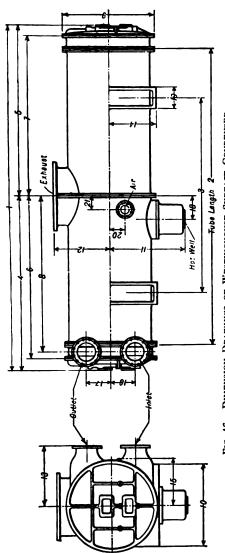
Dimension Drawings of Westinghouse Surface Condenser.
